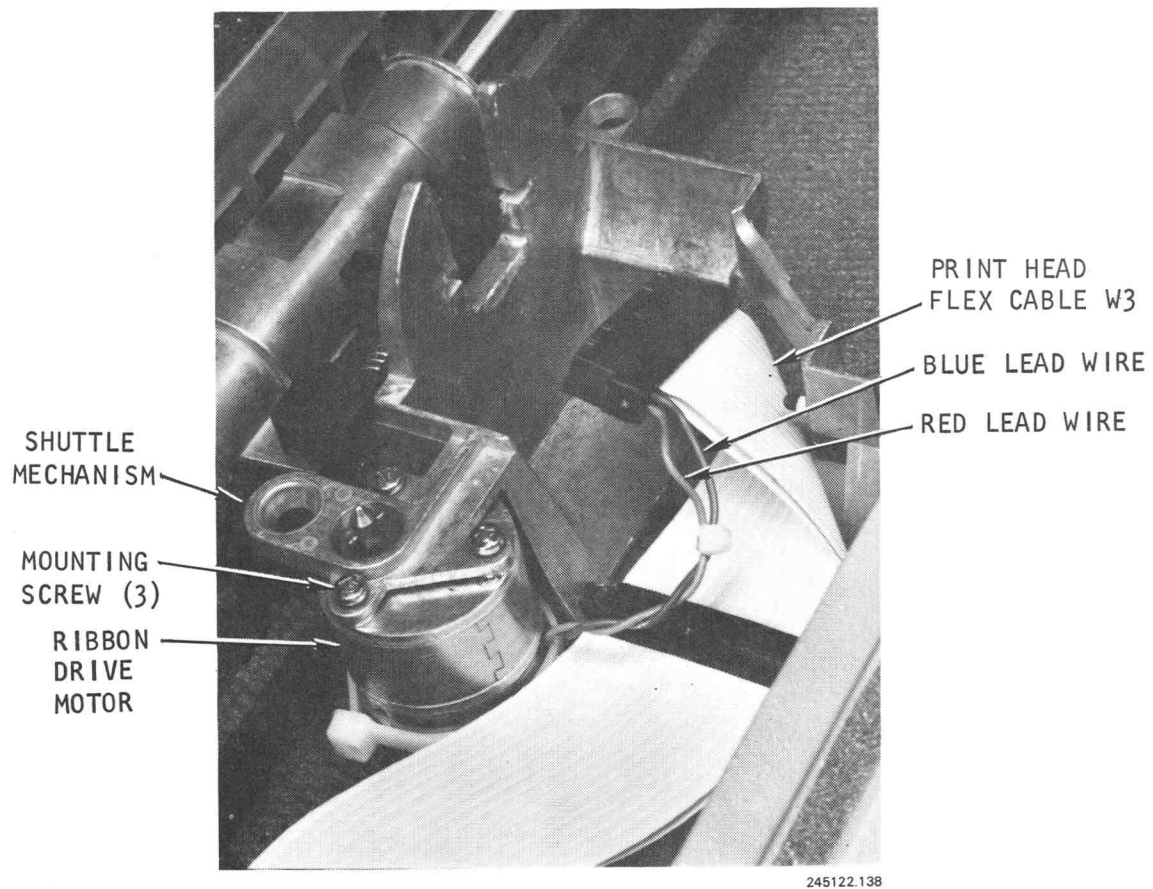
Ribbon Drive Motor Removal/Replacement
